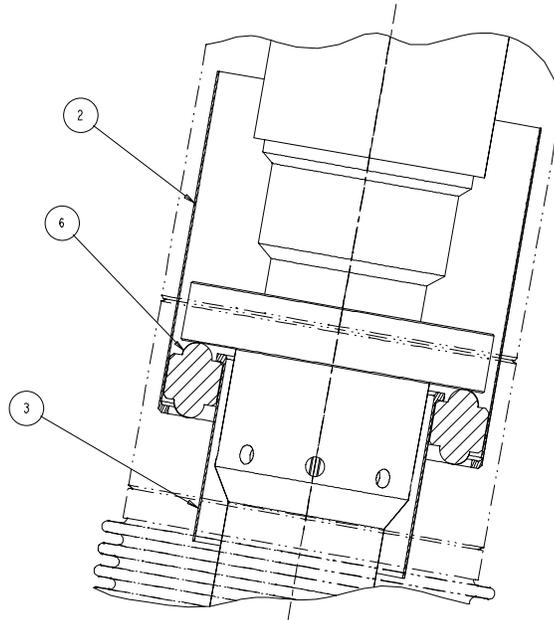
2 – Upper Insulator, 3 – Lower Insulator, 6 – PEEK Seal
